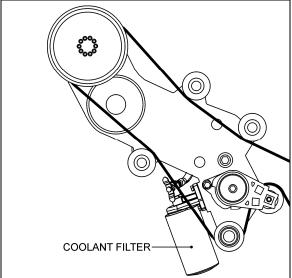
COOLANT FILTER (DDC S60 ENGINE) 05138
